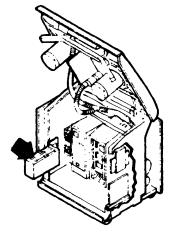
Control Unit Cooling Fan Assemblies Removal and Replacement
